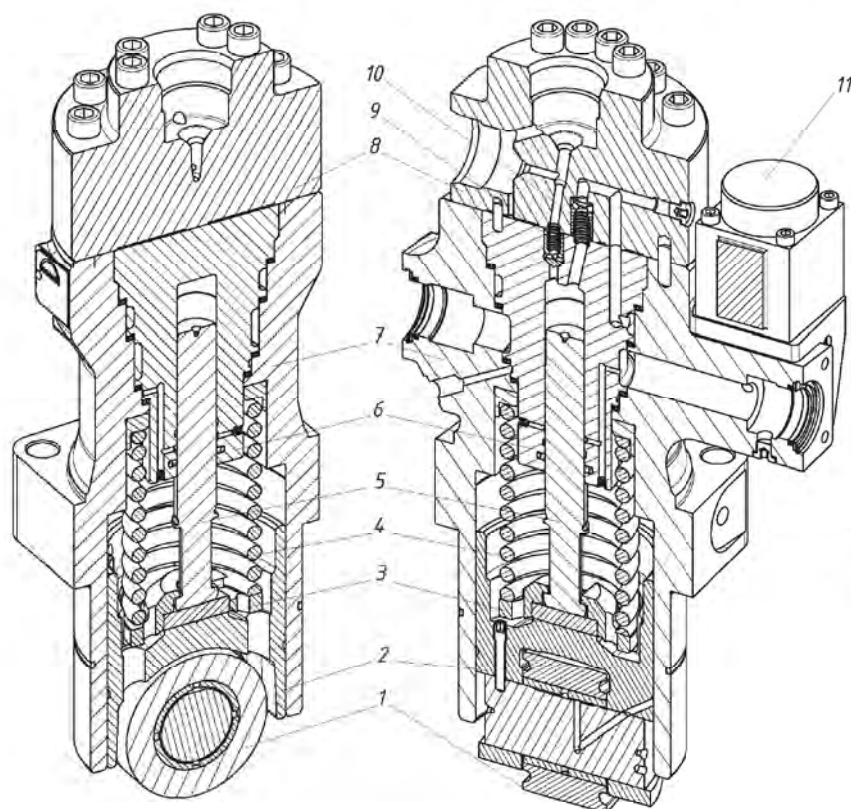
High-pressure fuel pump for MAN series 32/44CR engines: 1 – pusher roller; 2 – pusher; 3 – lower plate of the return spring; 4 – return spring; 5 – plunger; 6 – plunger bushing; 7 – housing; 8 – cover; 9 – delivery valve; 10 – suction valve; 11 – flow control throttle valve with electromagnetic drive (adapted from [60])
